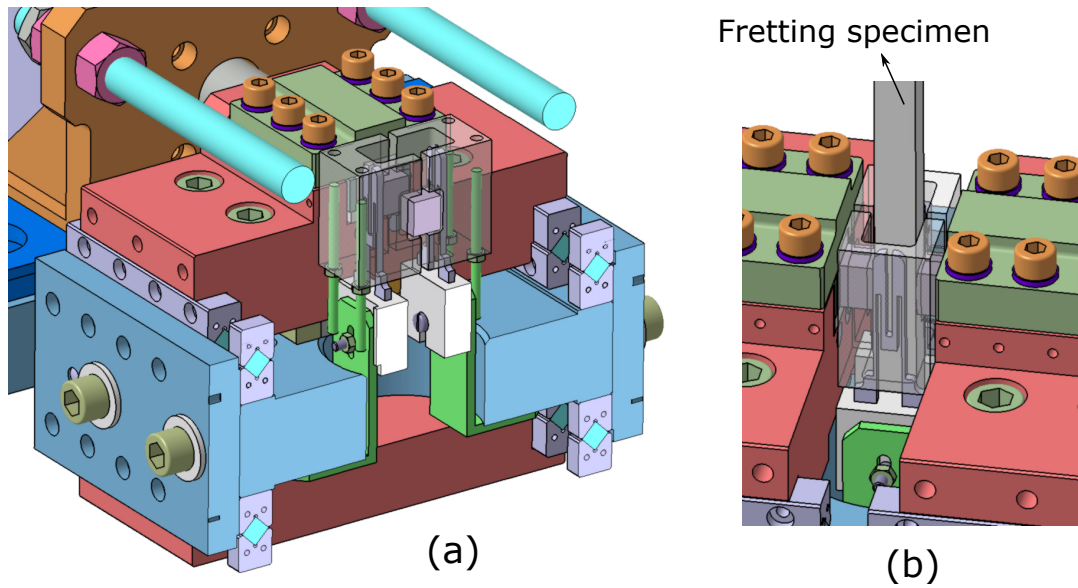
Cut view of the fretting apparatus detailing the igniters and its supports, and ceramic enclosure: (a) view without specimen and (b) view with the fretting specimen.
